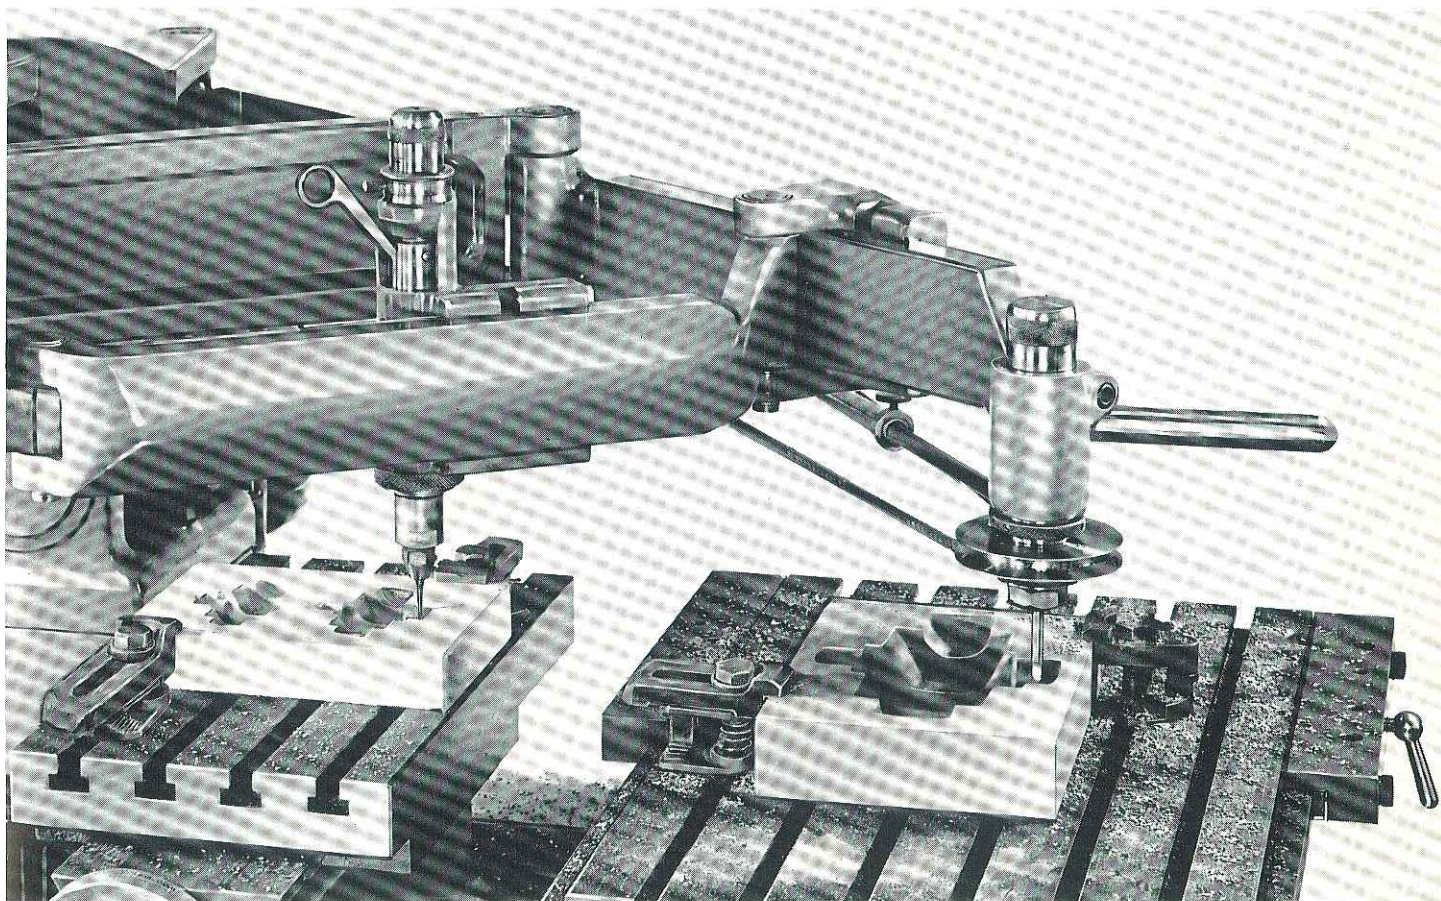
Enlarging a permanent casting mould from a cast resin master (GK 21)
